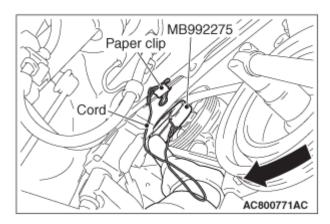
Installing Power Steering Oil Pump Drive Belt Using Special Tool MB992275
